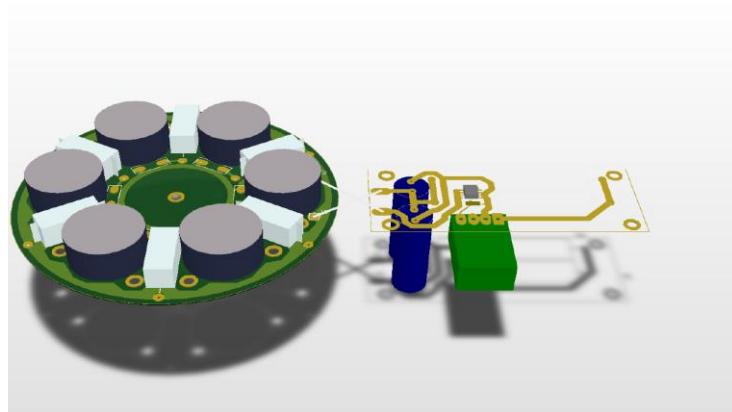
CAD image of circuit board layout, collimators are the black cylinders sitting on top of the LEDs, 30mm cut-out in the centre of the board is for the camera lens. The capacitor board is shown in transparent
